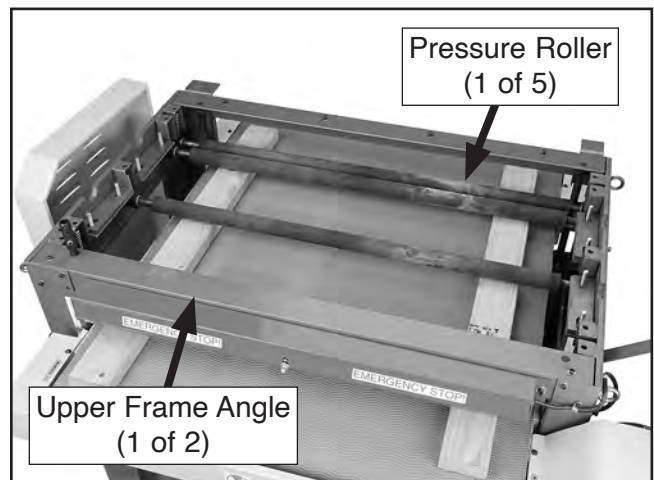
Gauge blocks set under pressure rollers to relieve spring tension.
